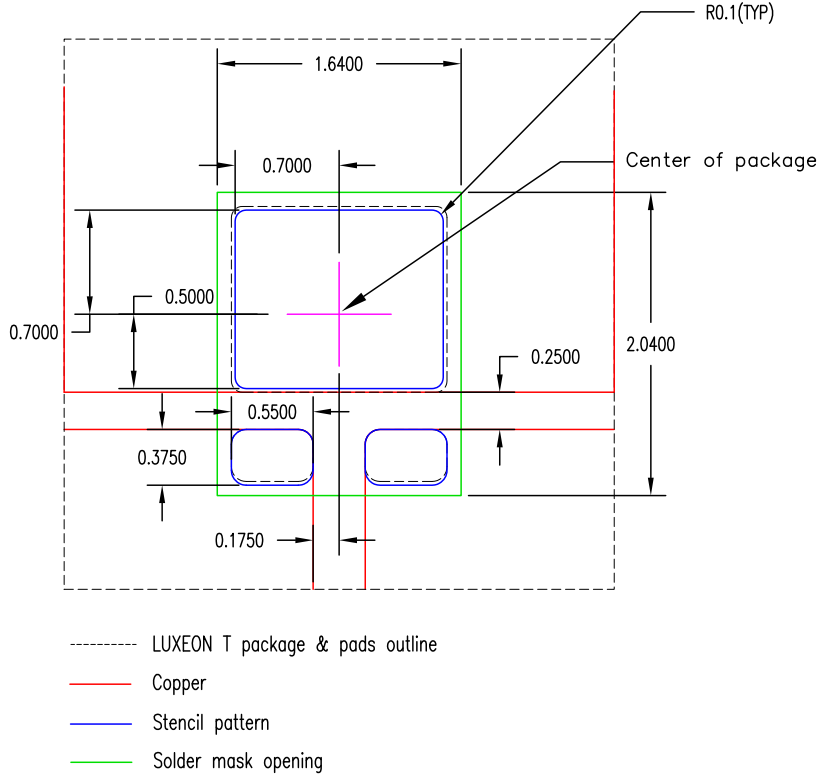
Recommended PCB solder pad layout for LUXEON T.
